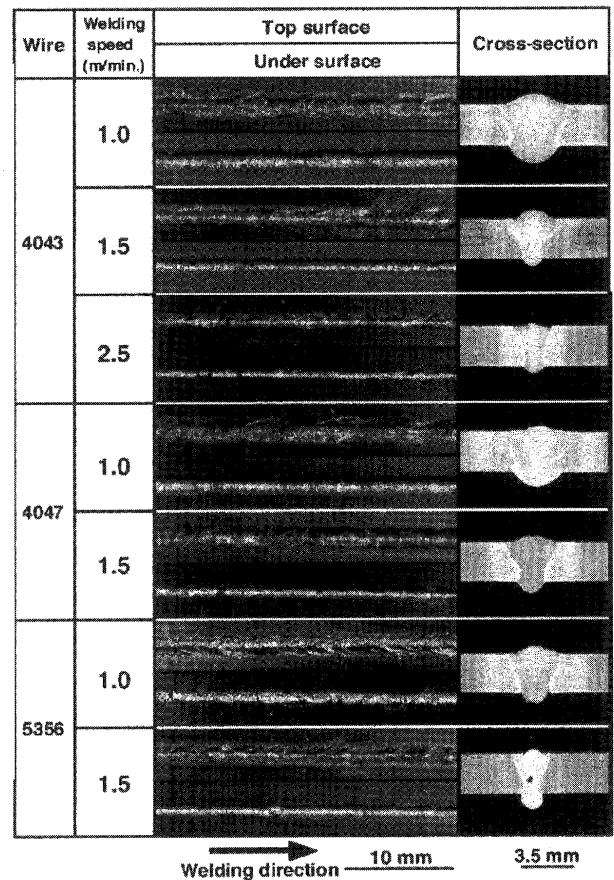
General appearance and macrostructure of cross-sections of laser welded beads.
